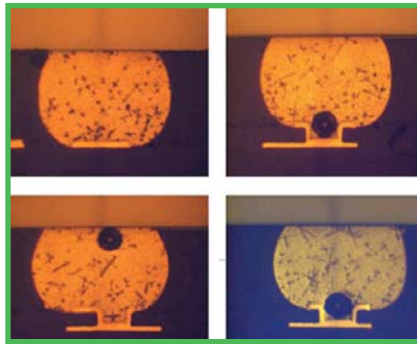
Cross sectional images of solder joints on conventional pad and via-in-pad structures.
